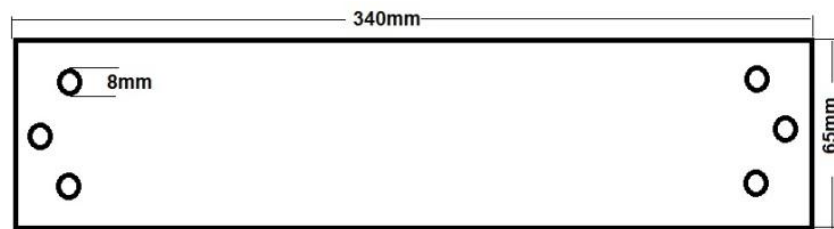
Schematic of the sample dimensions and loading hole positions
